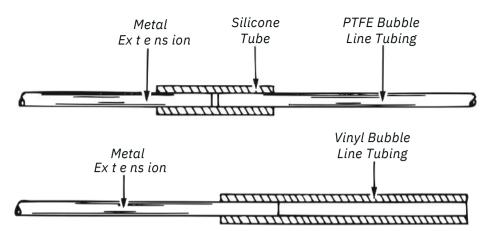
Installing the Stainless Steel Bubble Line Extension
